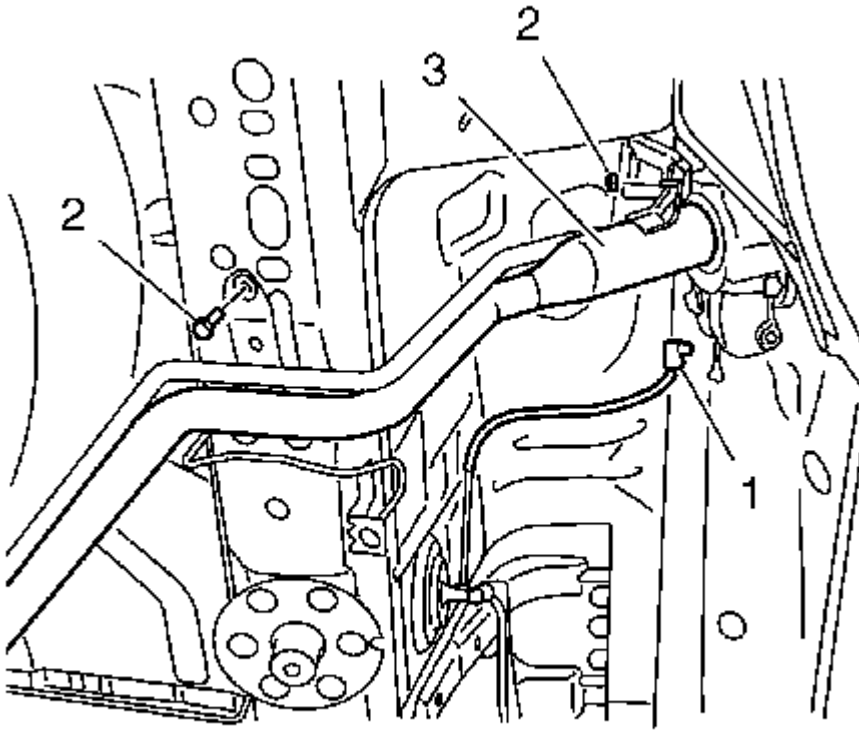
Fuel Tank Filler Pipe, Housing & Door Lock Actuator Wiring Harness Electrical Connector
